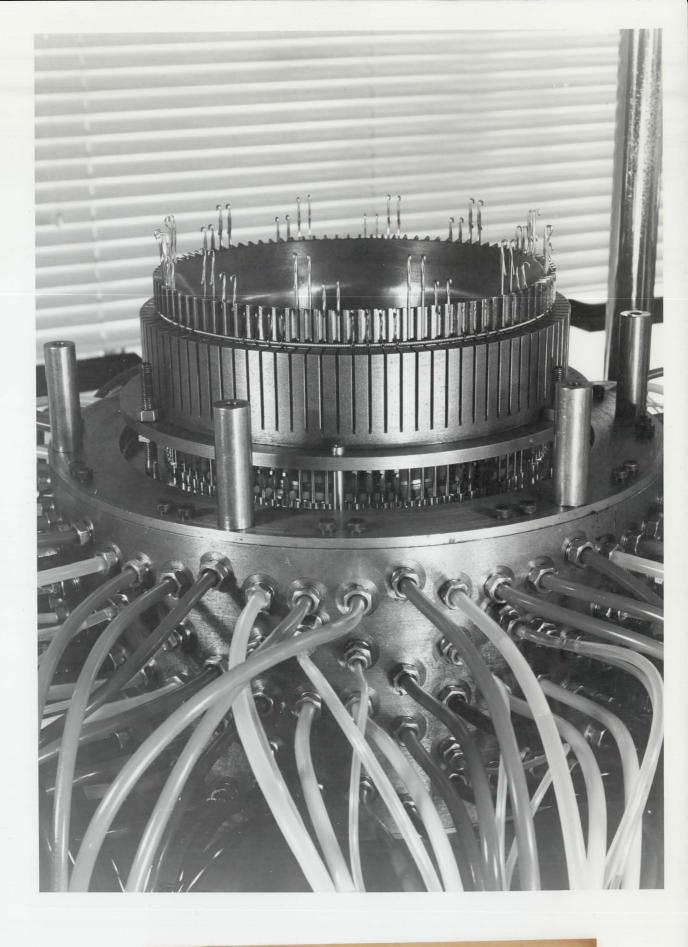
VIEW OF THE TRIX SHOWING THE KNITTING PROFILE OF THE NEEDLES hydraulic aspect of the machine, (how the manifold blocks are connected to the collar valve). The yarn carrier mechanism is also clearly visible. The last figure, 106 shows the knitting profile of the needles round the trix, without the yarn carriers in position. This needle profile round the trix mechanism remains static regardless of the rotational speed of the actuator block, so creating a hydraulic actuator system that should be capable of producing a knitted fabric in the near future.
